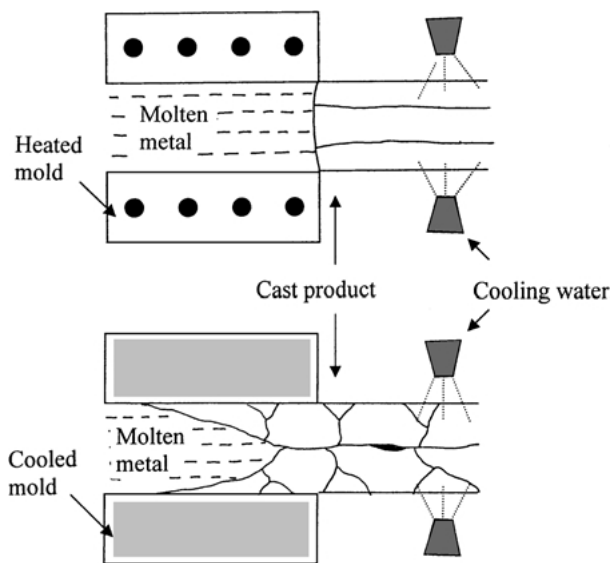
Schematic diagram of the OCC heated mold process in contrast to the conventional cooled mold continuous casting technique.
